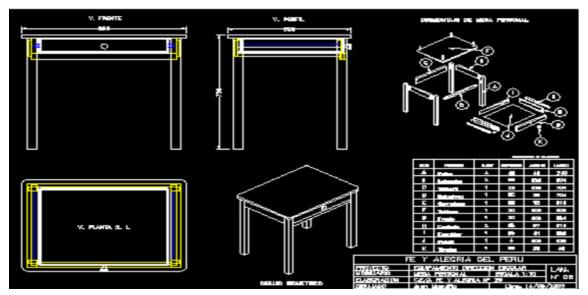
Drawing a table using AutoCAD showing isometric, orthographic projection and exploded view
